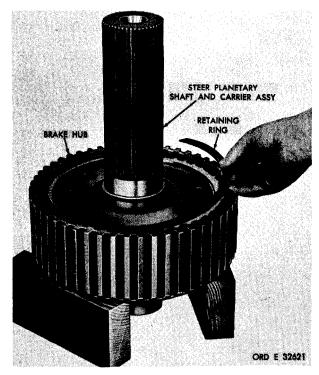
Removing (or installing) steer planetary carrier and shaft retaining ring
